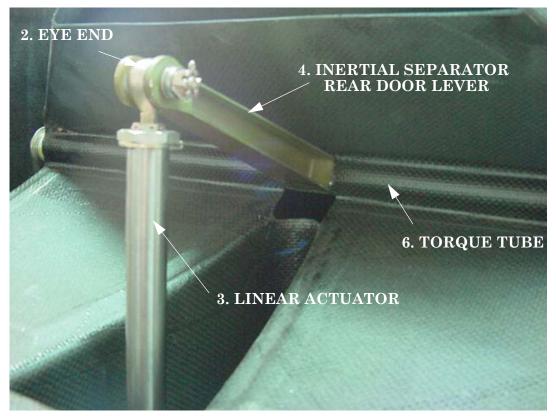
Inertial Separator Rear Door - Removal / Installation (Sheet 1 of 2)
